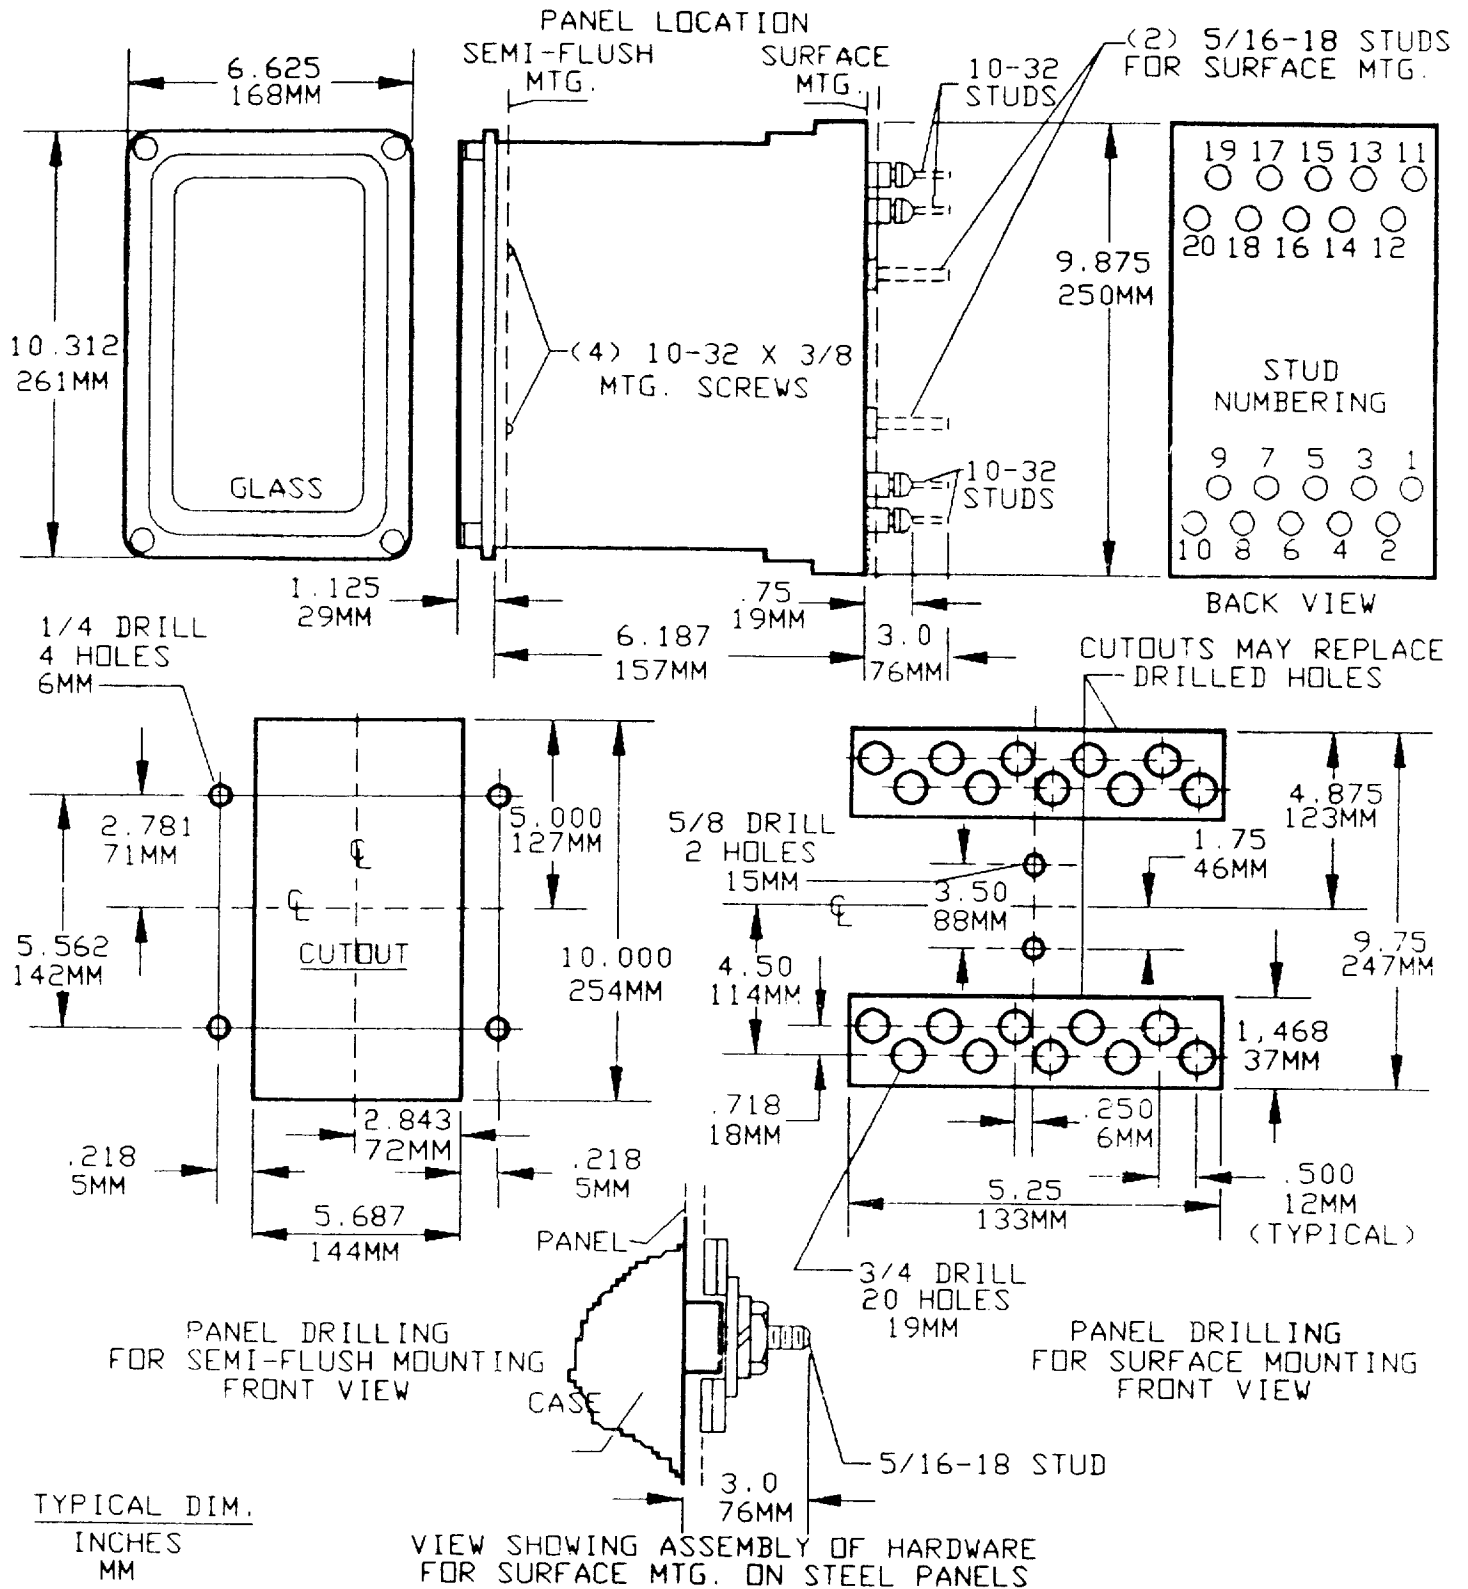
(6209272-7) Outline and Panel Drilling Dimensions for the S2 Size Case
